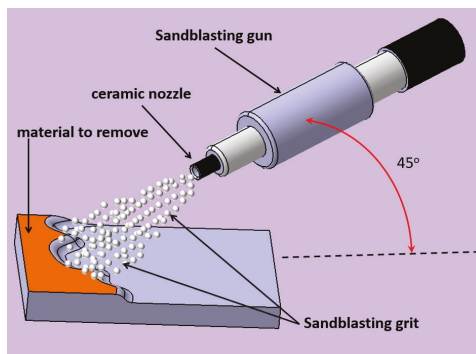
Schematic drawing of the sandblasting process used for S235JR steel samples.
